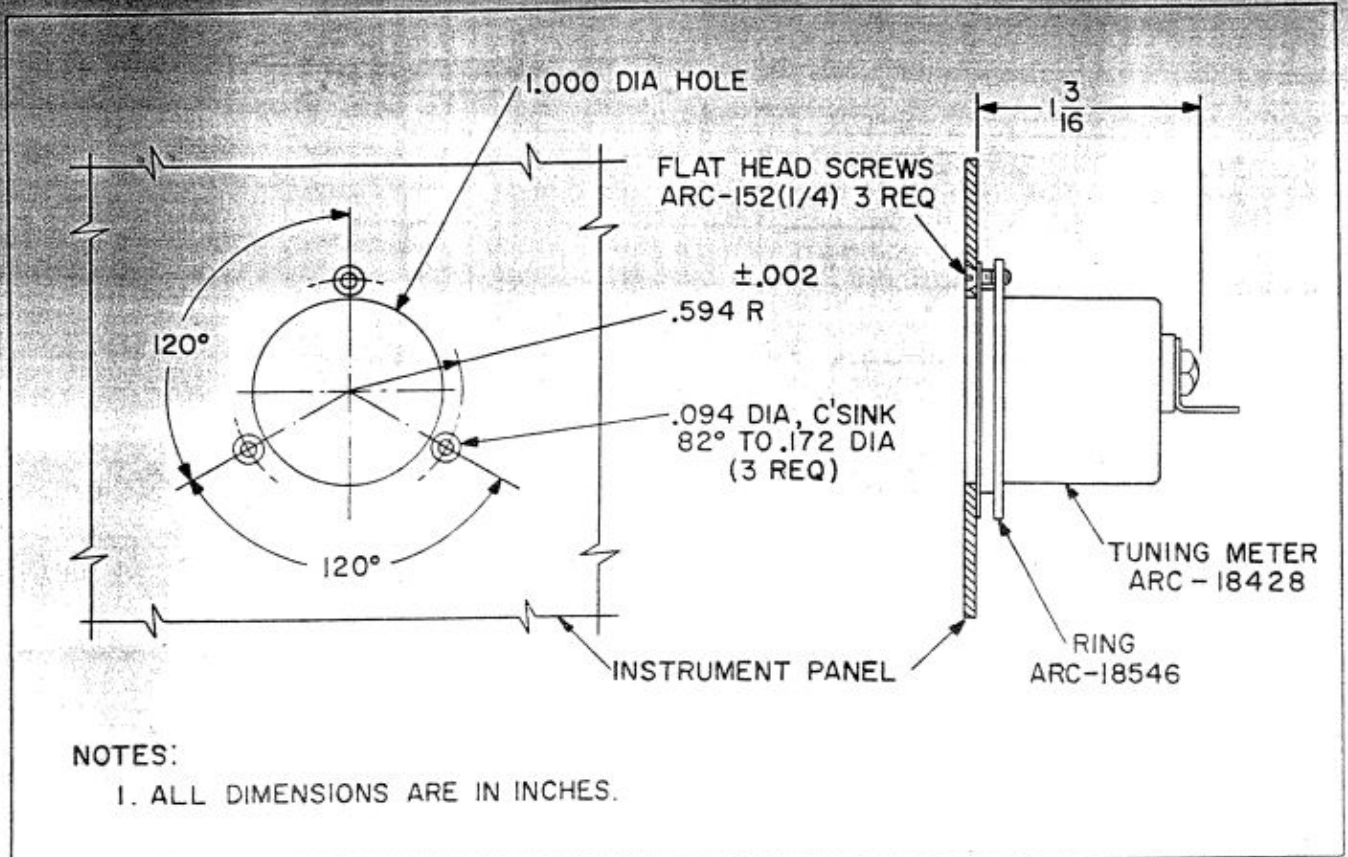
Panel Mounting Dimensions for Installation of Tuning Meter in Custom Control Panel
